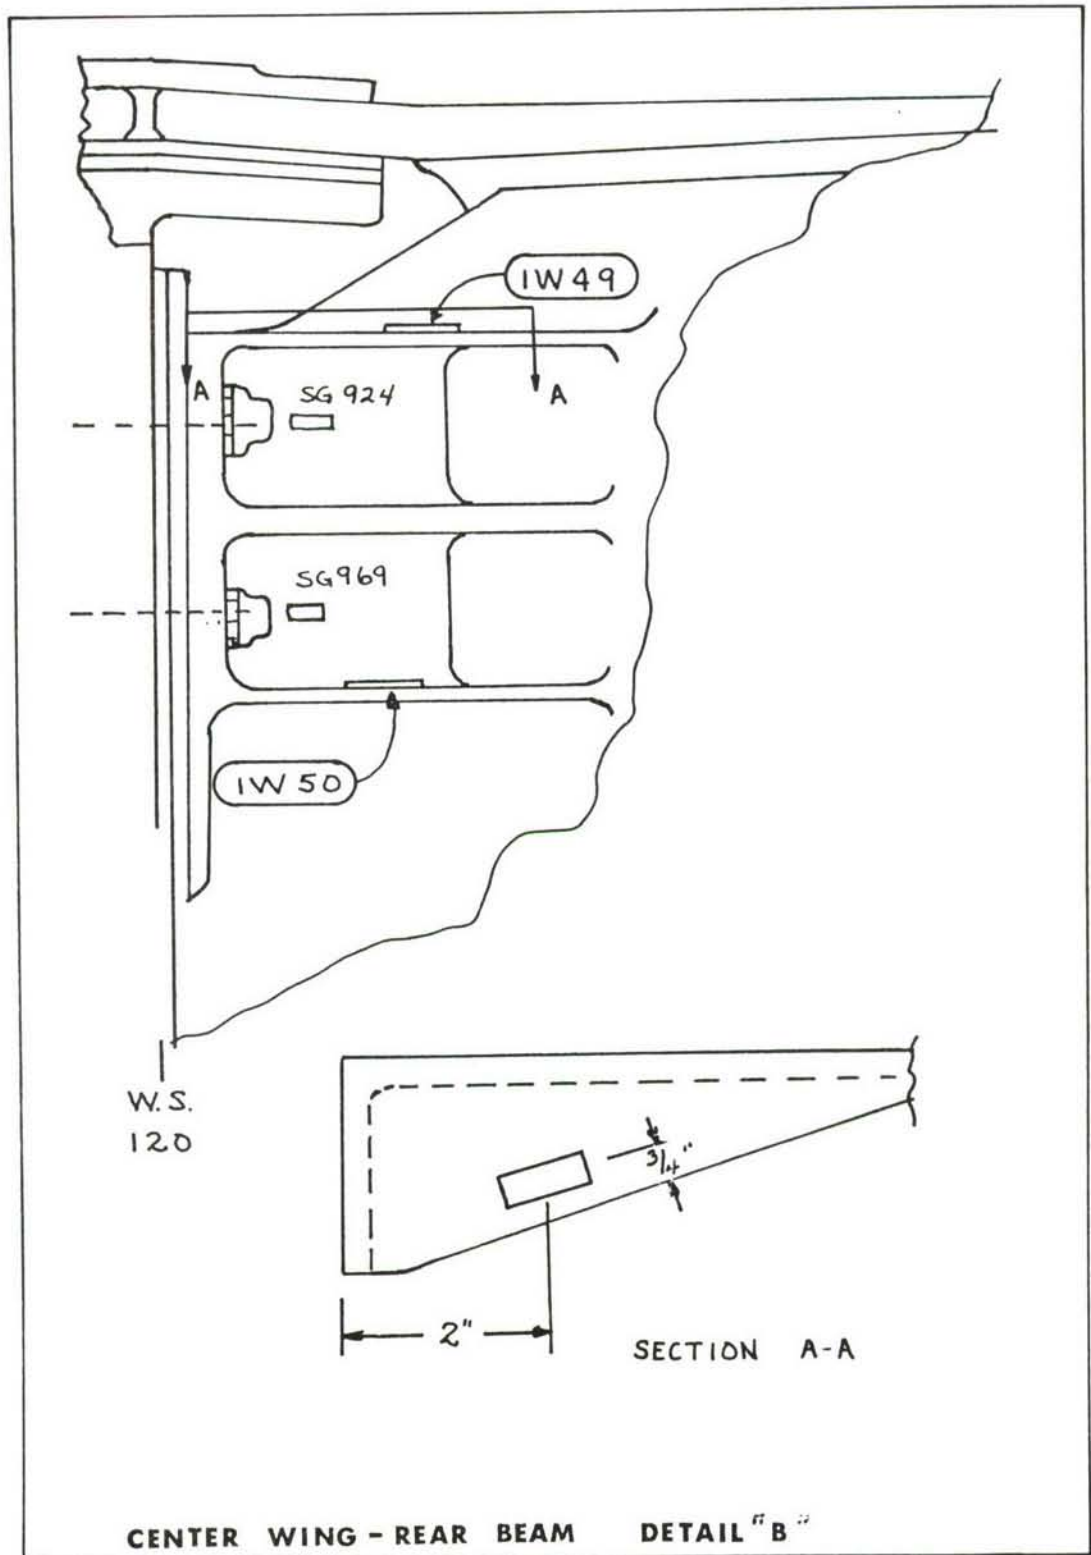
DETAIL OF STRAIN GAGE AND SENSOR LOCATIONS ON THE REAR BEAM ATTACHMENT FITTING
